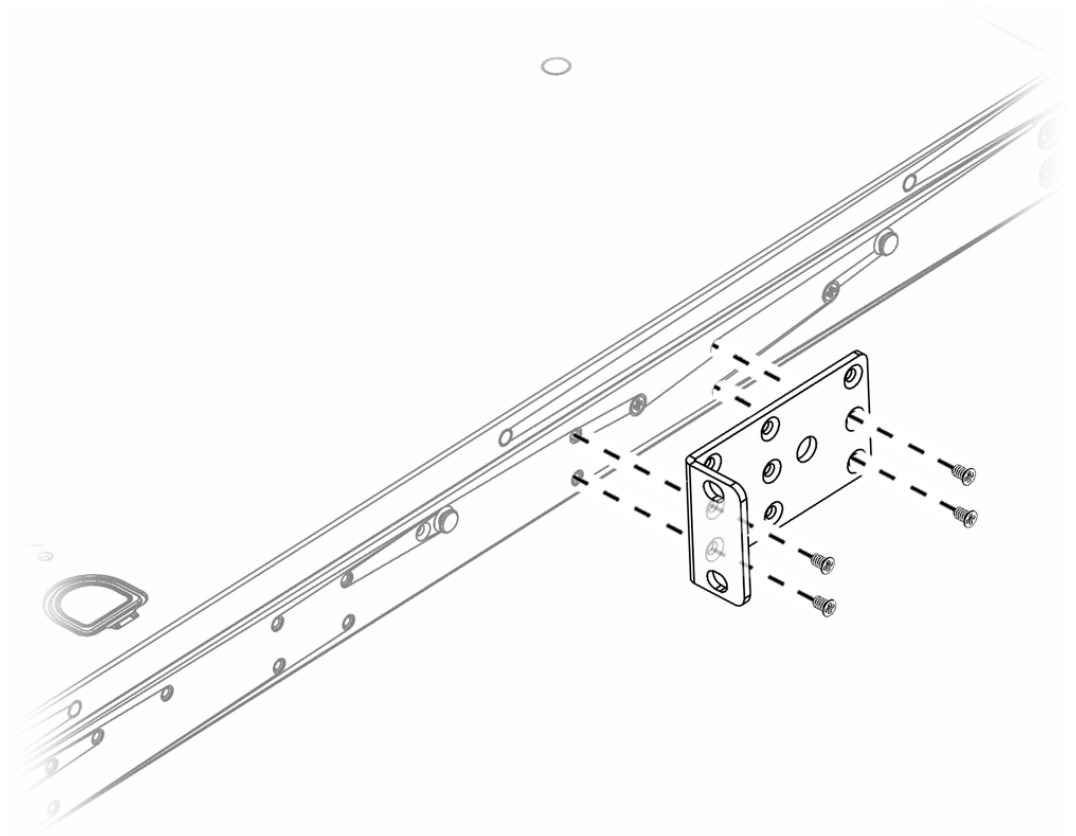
Attaching a Short Mounting Bracket (Ear): Middle of Switch
